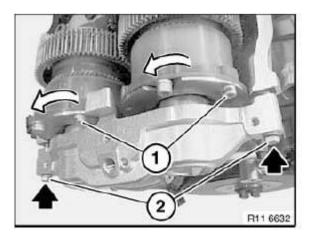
Locating VANOS Adjustment Unit Bolts Courtesy of BMW OF NORTH AMERICA, INC.
